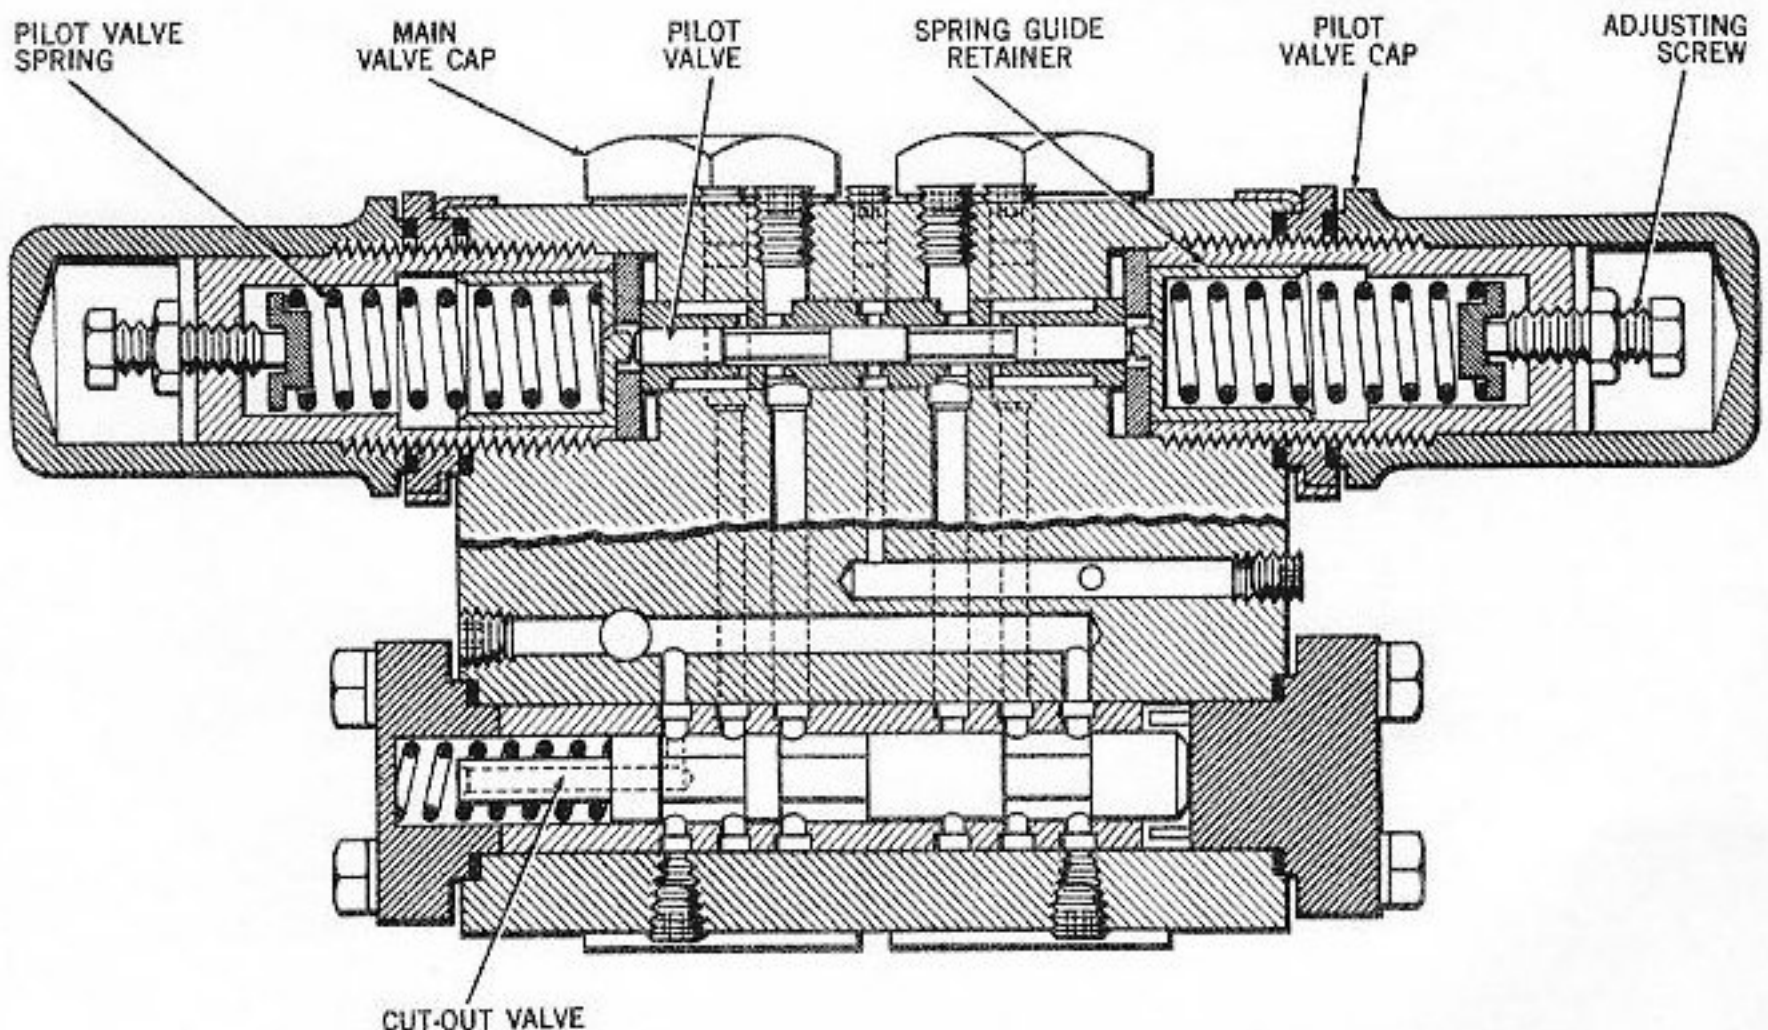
Elevating Gear Main System Relief Valve Adjustment, Sectional View
